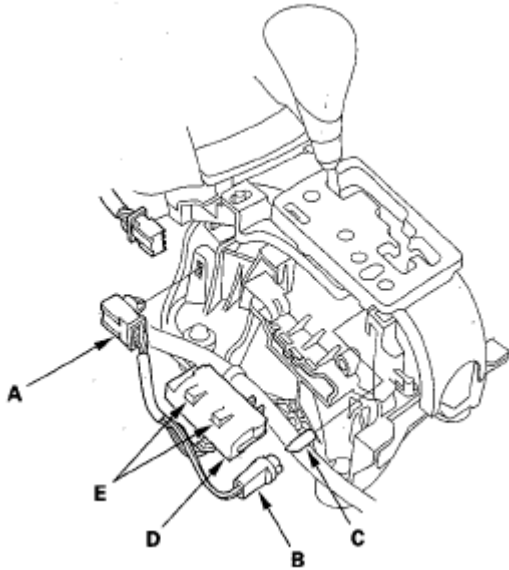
Identifying A/T Gear Position Indicator Panel Light Connector And Gear Selection Switch
